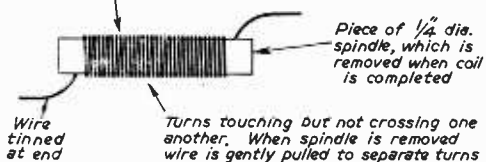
The 100 mA shunt. The shunt is wound on a  $\frac{1}{4}$  in. spindle which is then removed.
